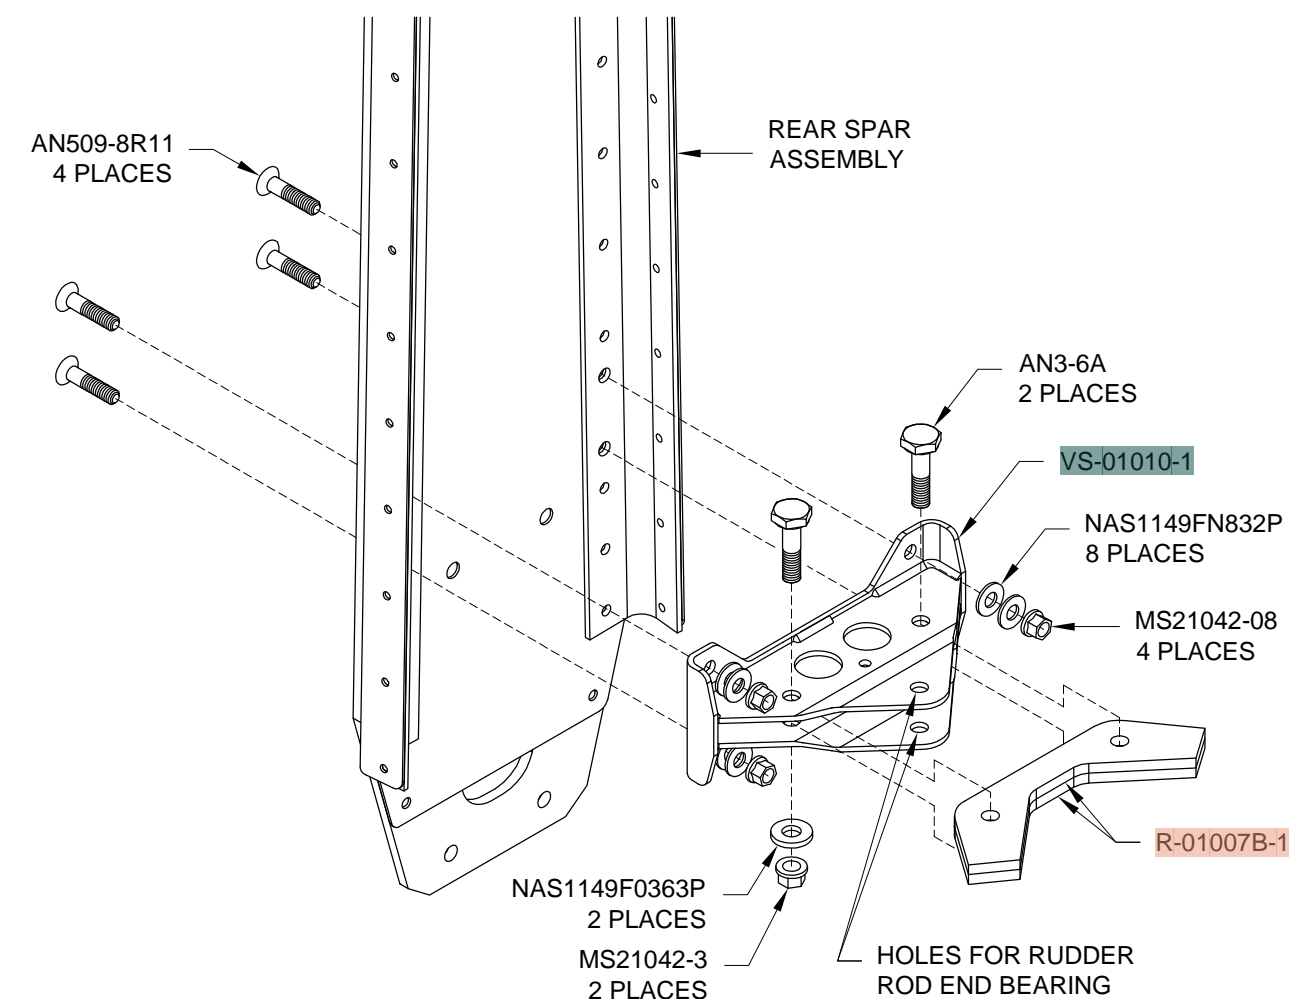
ATTACHING THE BOTTOM HINGE BRACKET AND RUDDER STOPS
